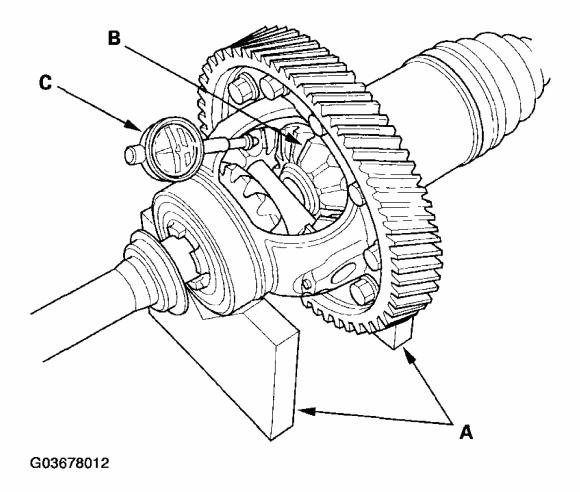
Installing Axles And Measuring Backlash Of Both Pinion Gears With Dial Indicator
